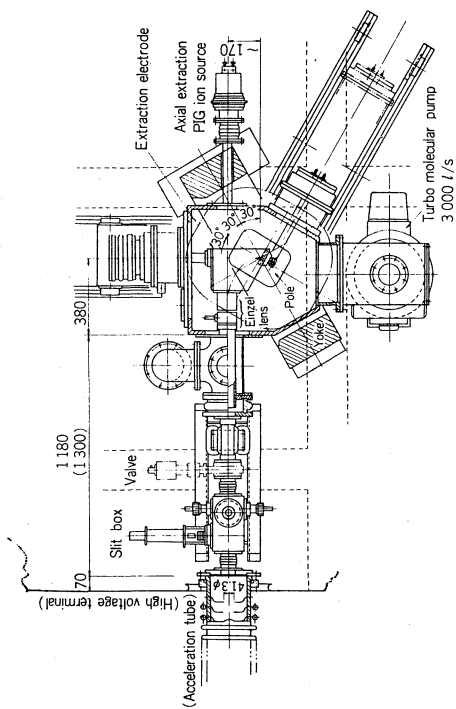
Plan drawing of the magnet and the vacuum chamber.
